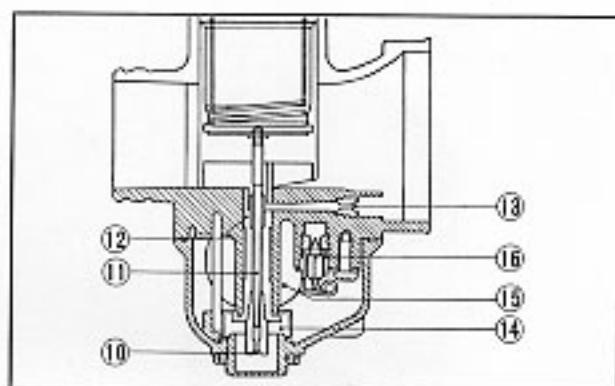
⑩ Main jet ⑭ Jet holder
